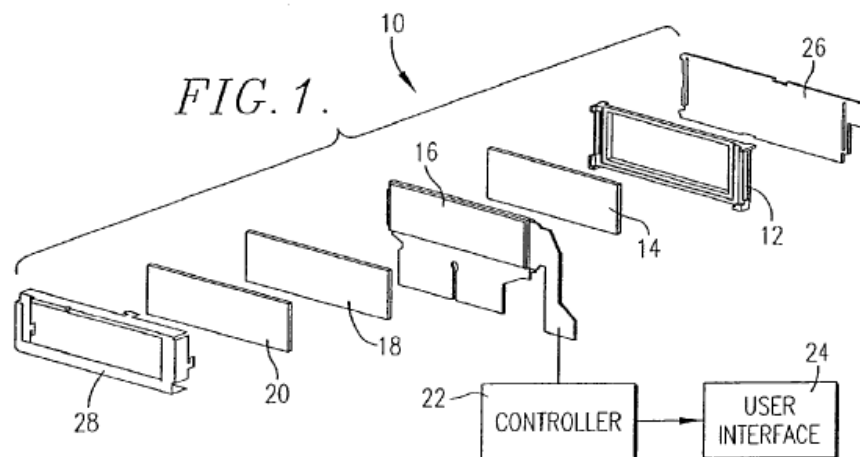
of Kabel, reproduced below, shows an exploded isometric view of the components of a display including a backlight. *Id.* ¶¶ 14, 17–18.
